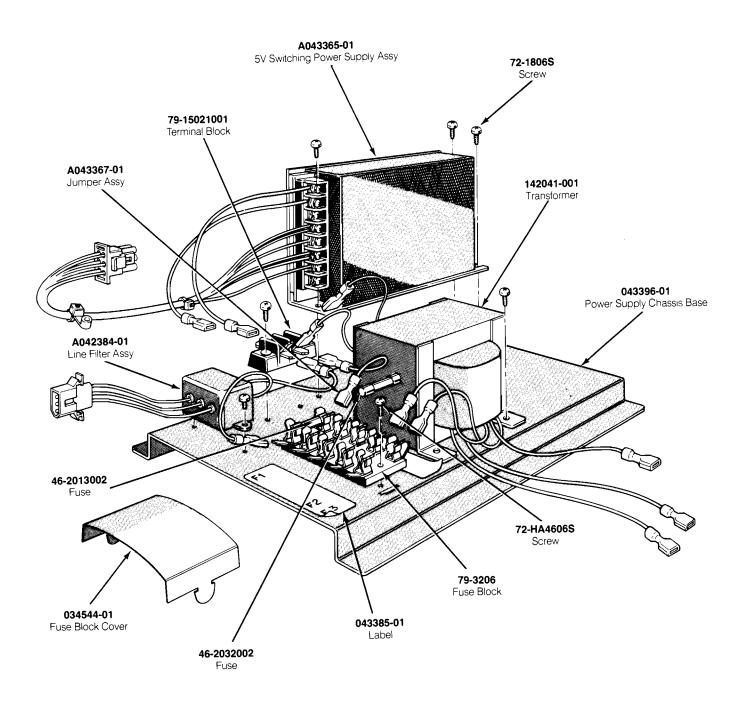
Switching/Linear (SL) Power Supply Assembly A043363-01 A
